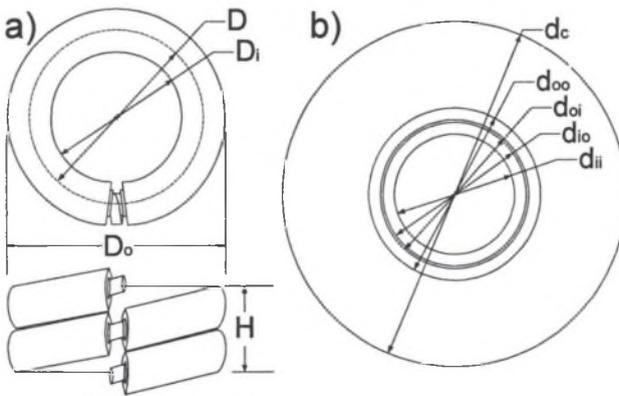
Dimensions of the basic transformer (BT): a) top and front view; b) cross section of the windings and magnetic core
